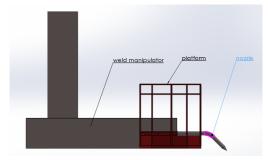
Front 3D Weld Manipulator View Without Bracket In SolidWorks
